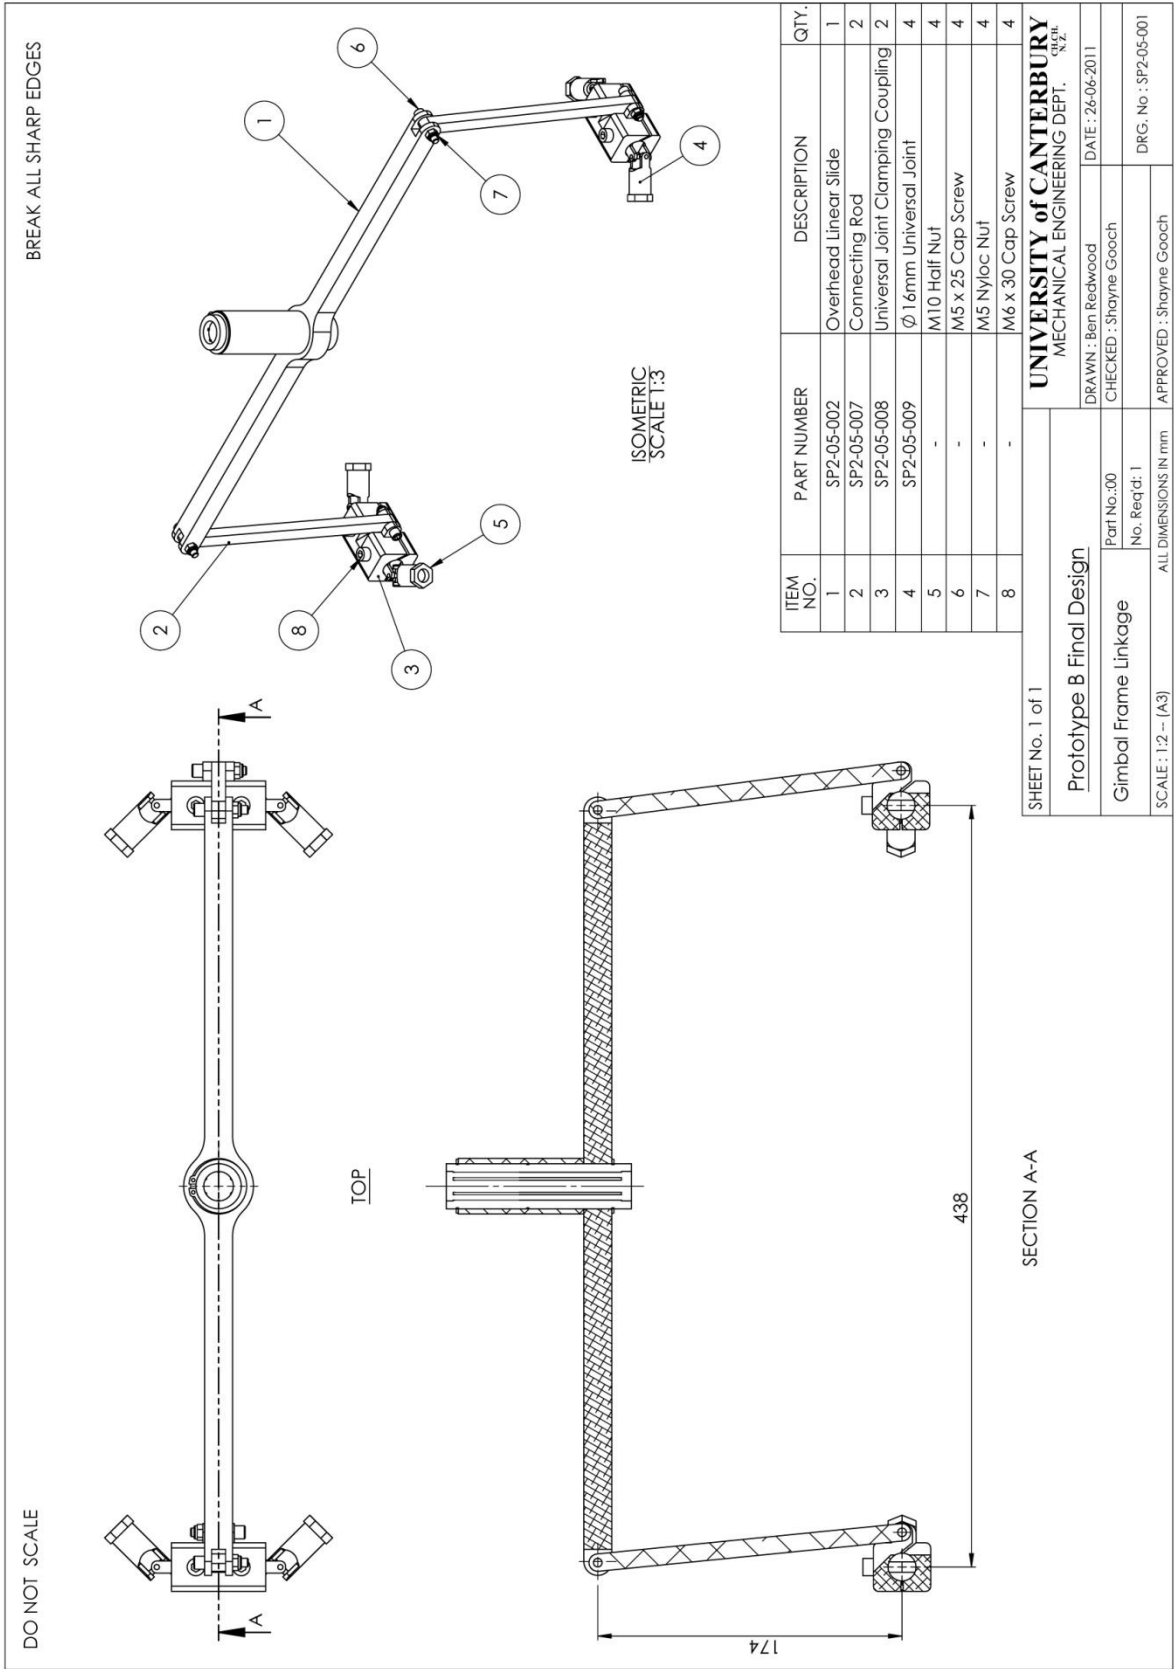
Prototype B gimbal frame linkage engineering drawing
